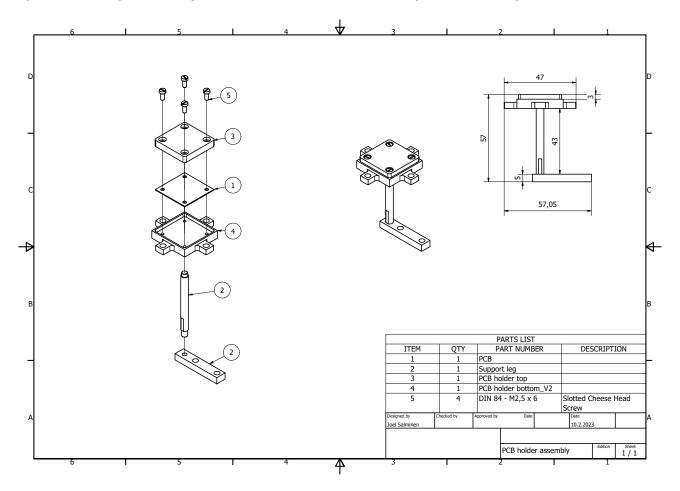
Overall schematics of NANO-J sample holder. The setup consists of 5 parts: top copper lid with shielding pattern, PC board, bottom part with screw holes for direct attachment to MC plate and a threaded hole for supporting elements assembly, and two peaces of supporting elements: a leg with double thread and a foot with holes.
